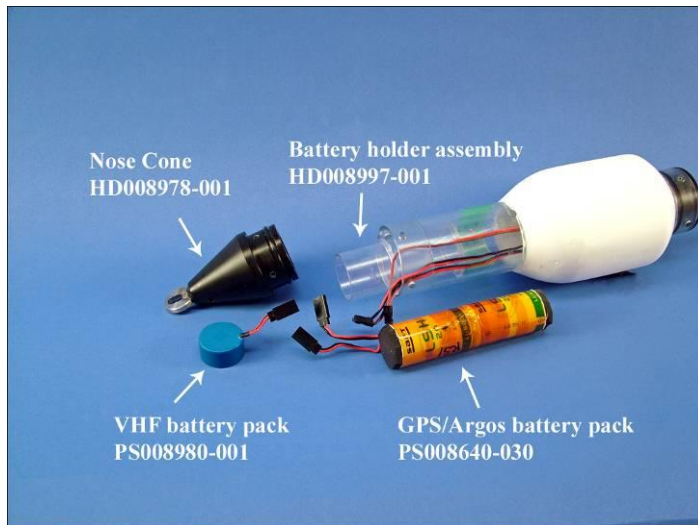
Battery packs disconnected and removed from housing and nose cone showing GPS-ARGOS battery holder assembly protruding from the housing.
